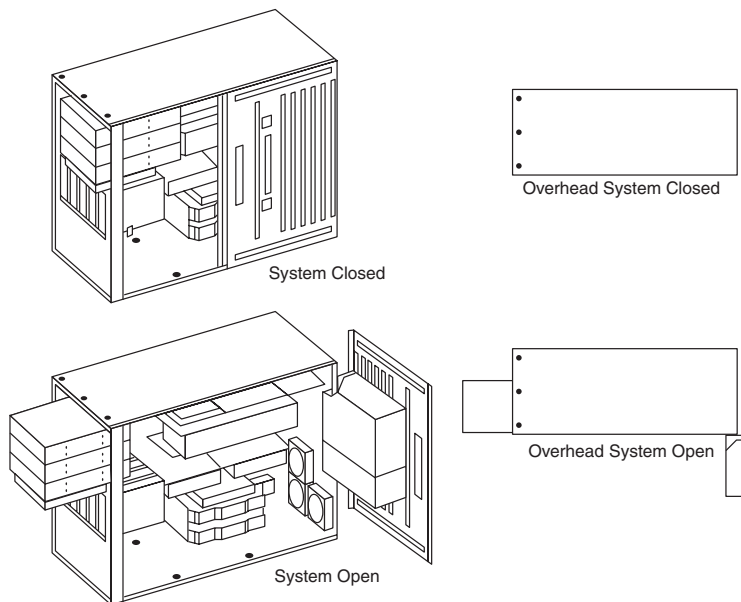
Typical WTX system chassis showing internal layout and ease of access.
